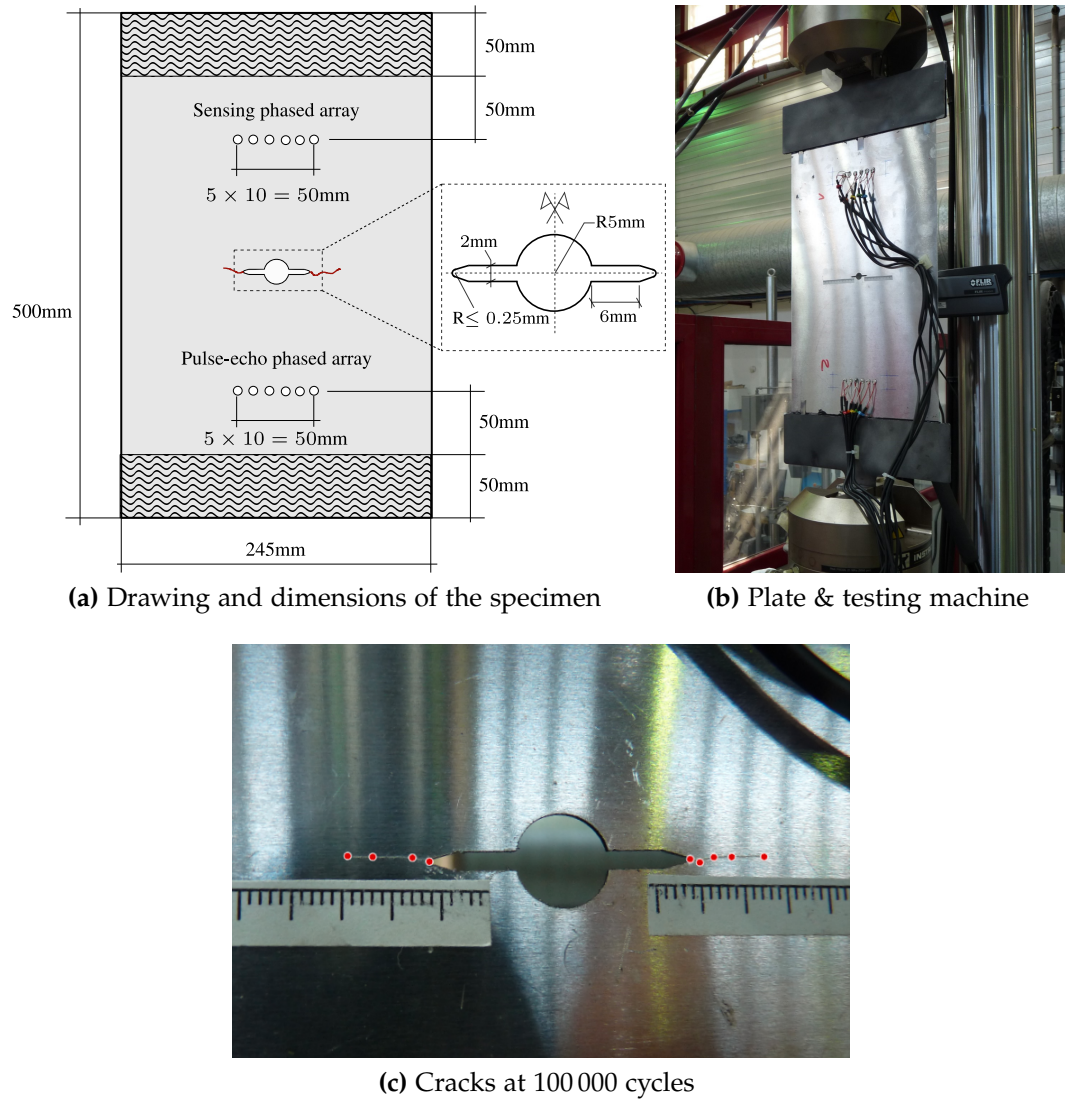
Drawing of the plate used for the fatigue test in (a) along with a photo in (b) of the specimen mounted into the fatigue testing machine. Finally, in panel (c), a zoomed picture used to measure the crack length at 100,000 cycles.
